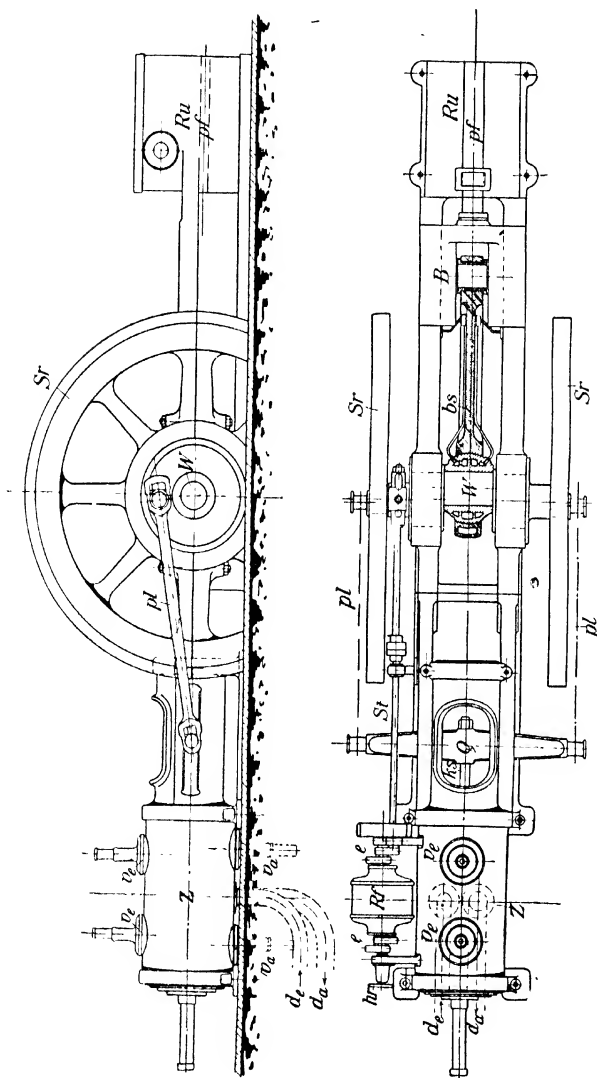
Exter press of Buckau construction with positive valve gearing and internal cooling of the ram bearing.
